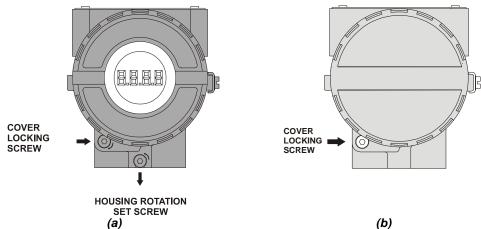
Cover Locking and Housing Rotating Set Screw (a) Electronic Board Side (b) Terminal Connection Side
